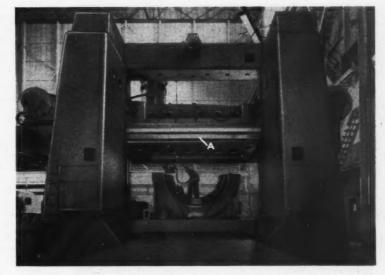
Set-up on a 300-ton Kendall & Gent plano-milling machine for operations on the joint faces of a turbine half-casing
